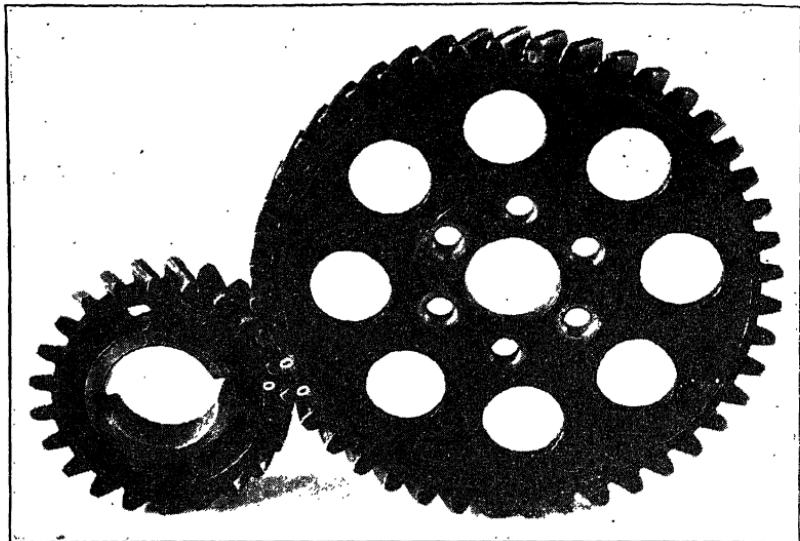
Timing Gears (Crankshaft and Camshaft), Showing Timing Marks
